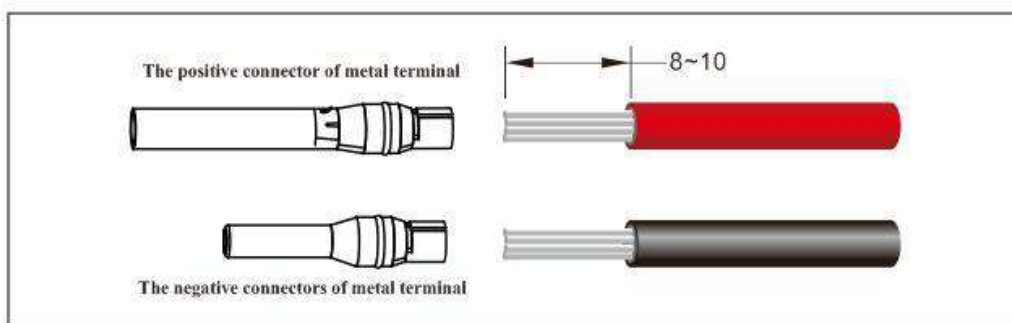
Stripping the insulation layer from DC power cables (unit: mm)
